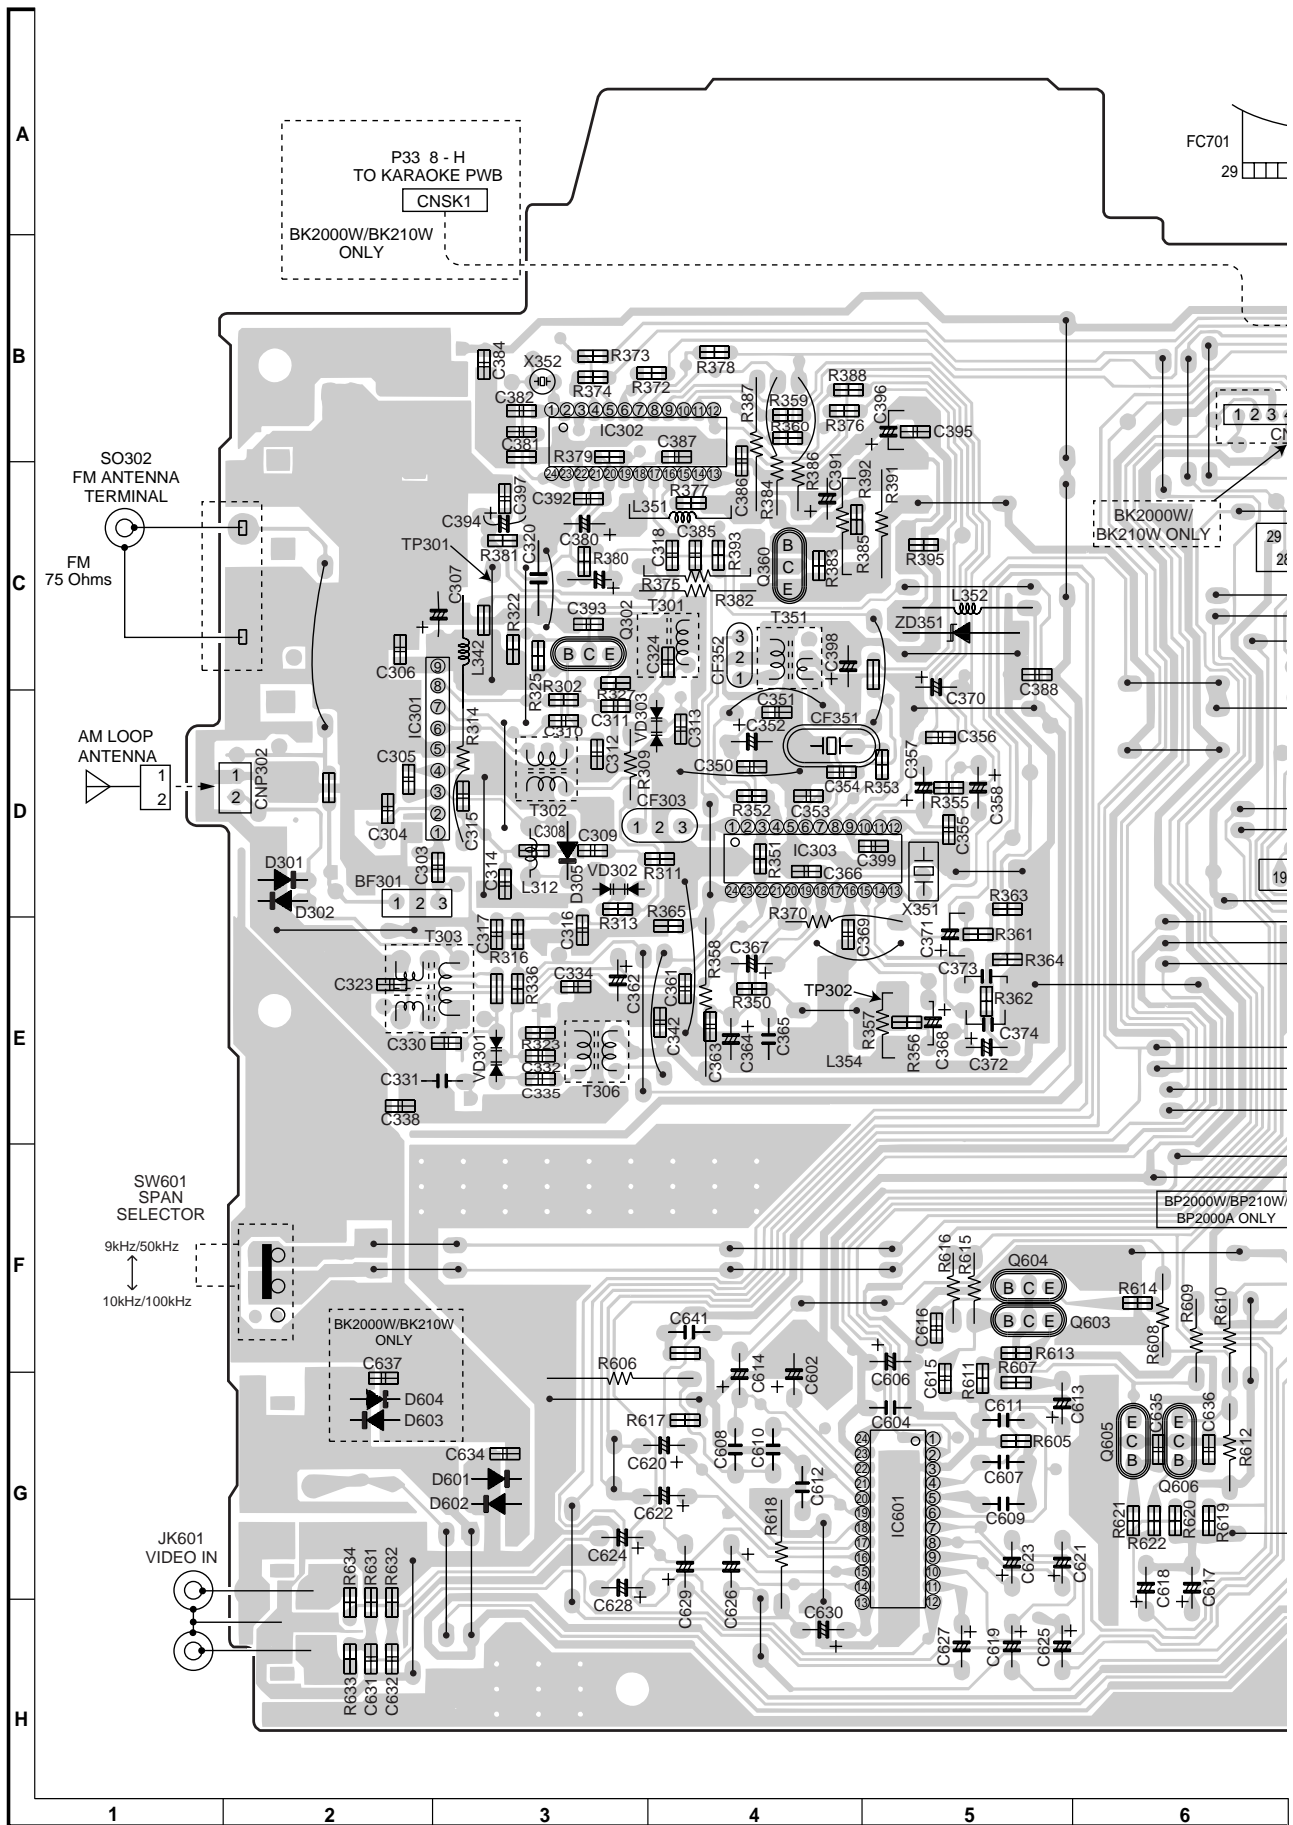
WIRING SIDE OF P.W.BOARD (1/9)
